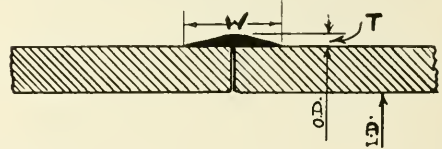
A TYPICAL CROSS-SECTION OF BRONZE WELD AS APPLIED TO PIPE. (By Courtesy of the Acetylene Journal.)
